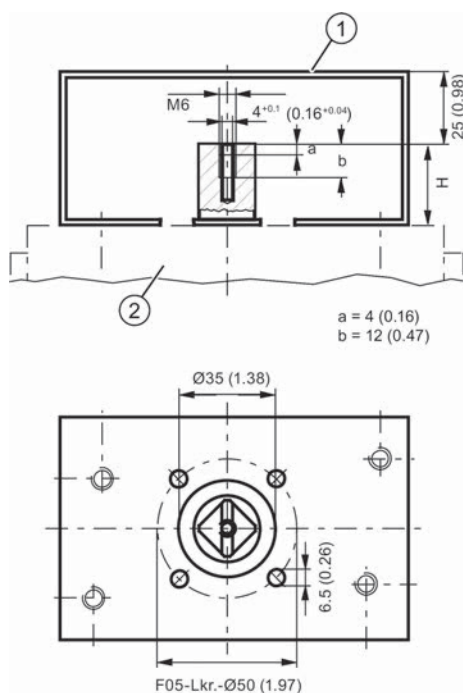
Mounting bracket (supplied by the actuator manufacturer) and dimensions
